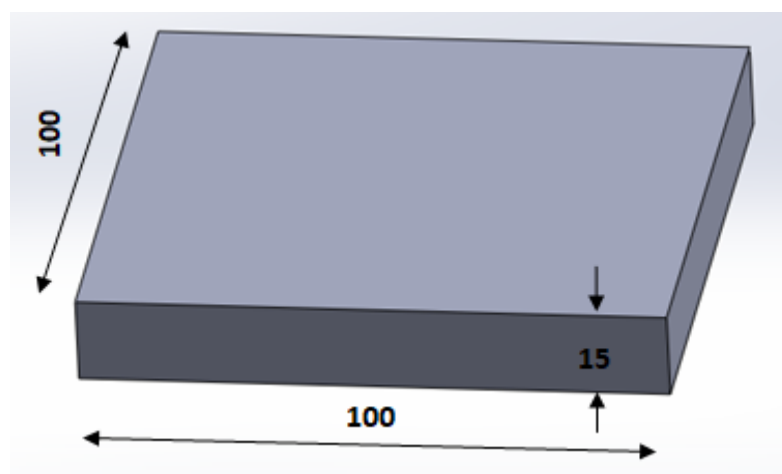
Dimensional Representation of Workpiece (in mm)
